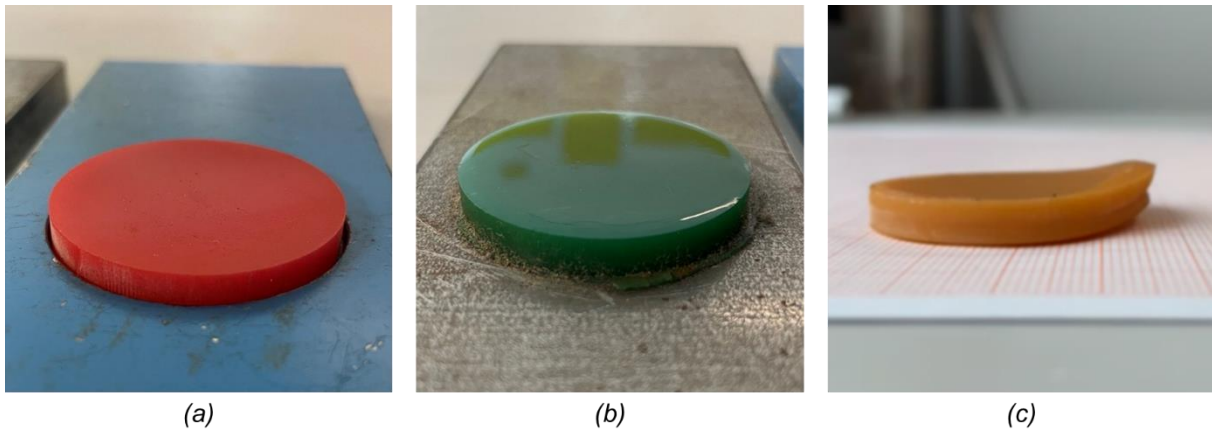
Difference between temperature tests: (a) PU sample in pad holder, (b) PU pad on steel back plate, (c) Possible PU sample deformation for PU sample in pad holder
